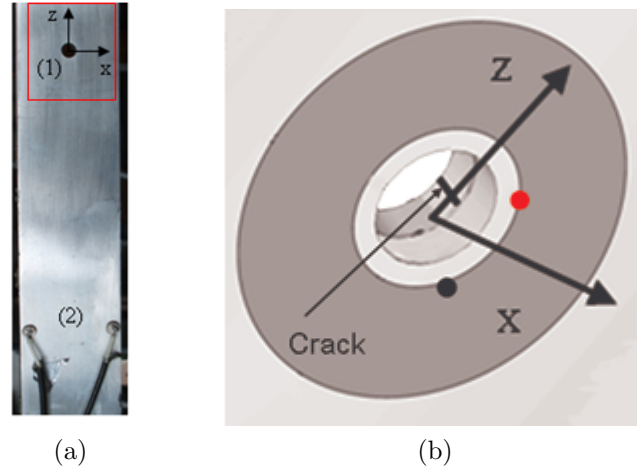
(a) Tensile specimen with fastener hole (1) and excitation (2); red rectangle is enlarged and shown in figure (b); (b) schematic view of fastener hole and fatigue crack location on specimen; measurement grid (dark gray area), measurement point for single point monitoring during the first set of experiments (red dot) and second/third set of experiments (black dot); wave propagation in z-direction, used coordinate system marked.
